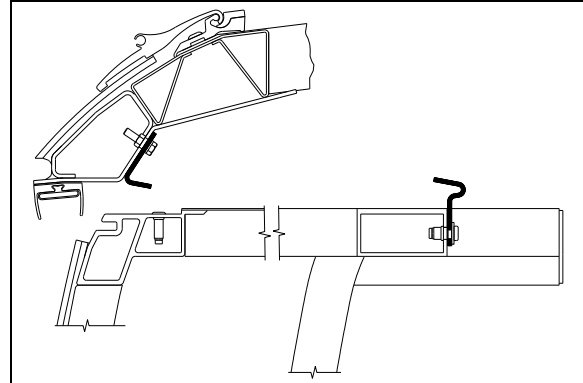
SLIDE-OUT 2" INSIDE – UPPER PART
